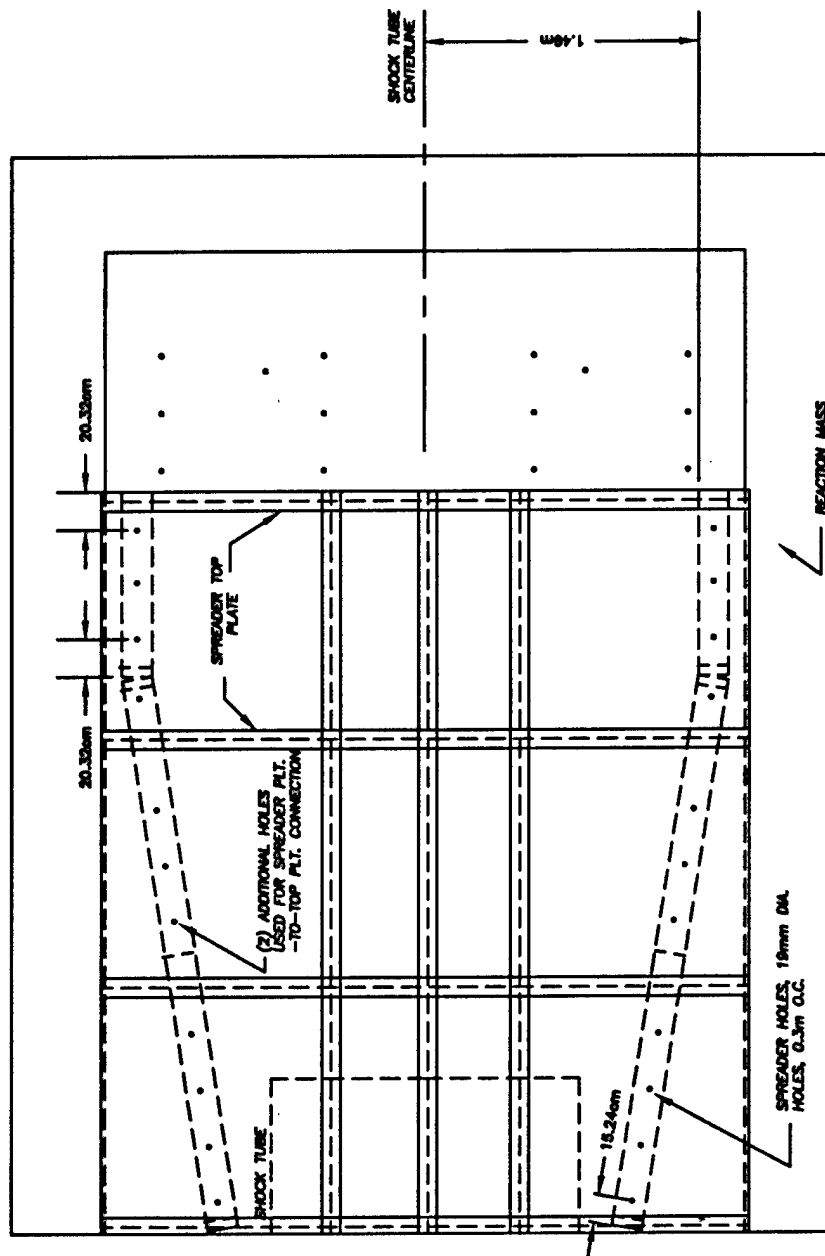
Assembly Details of 1.68-m Shock Tube Exit Jet Spreader, Sheet 1.
